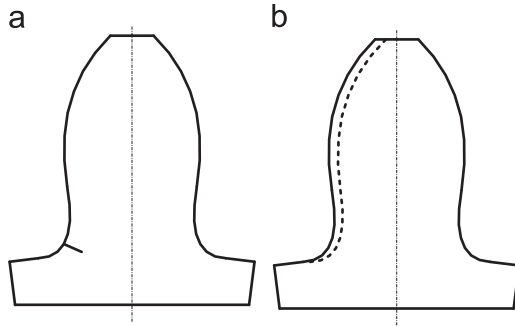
Gear conditions tested: (a) cracked gear and (b) worn gear.
